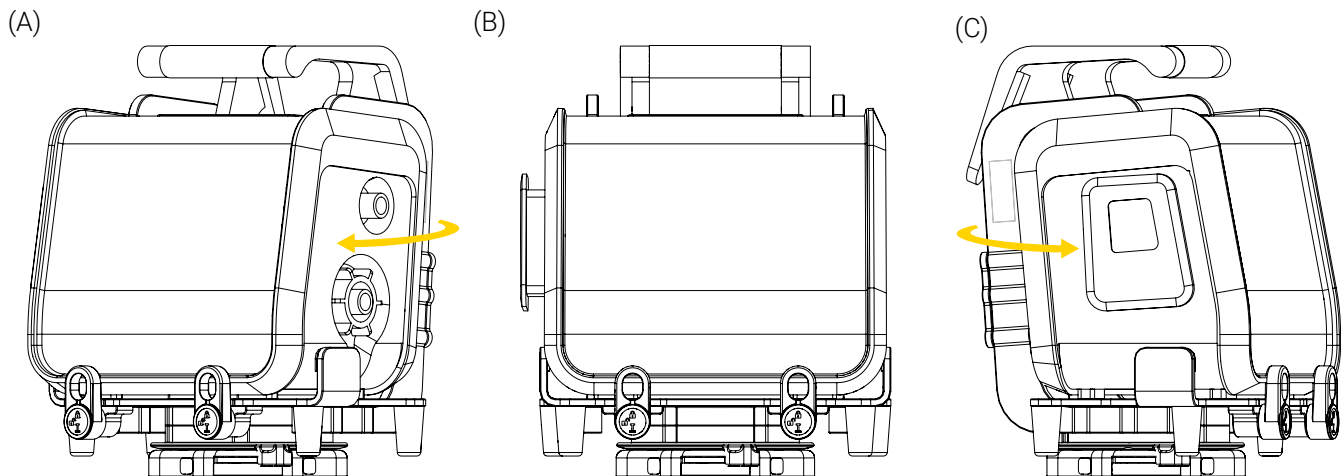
Rotating the mounting bracket on the Universal Mounting Base
